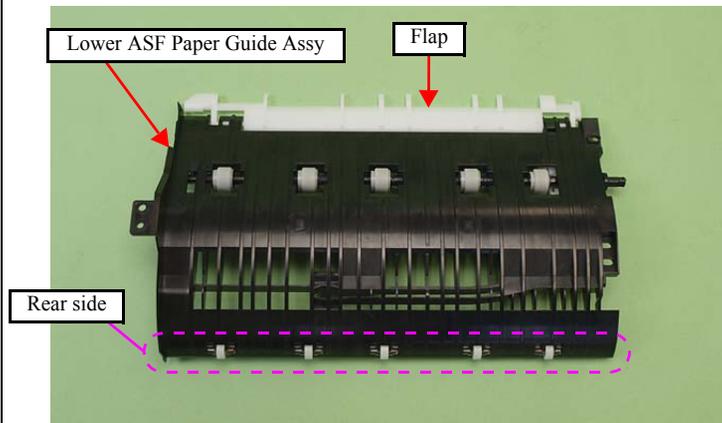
Installing the Lower ASF Paper Guide Assy
